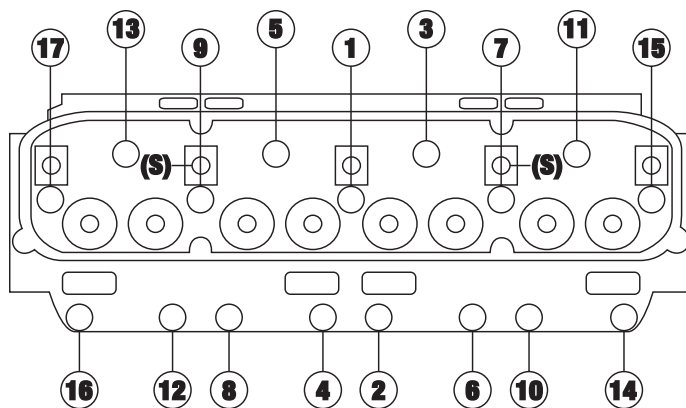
Cylinder Head Bolt Tightening Sequence
